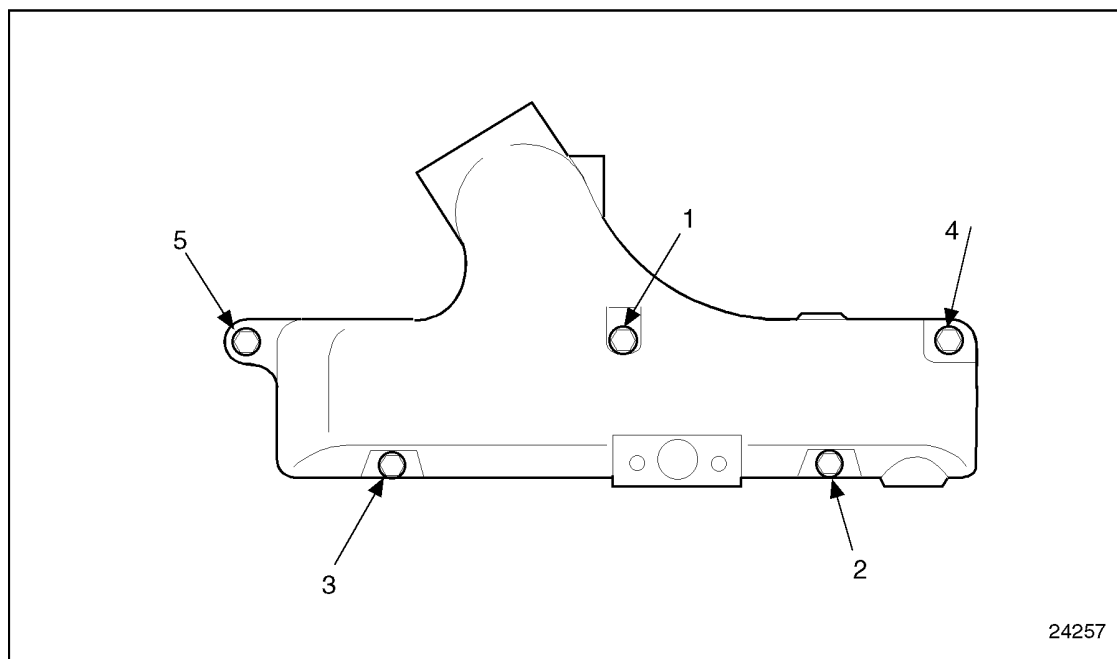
Intake Manifold Bolt Position and Torque Sequence
